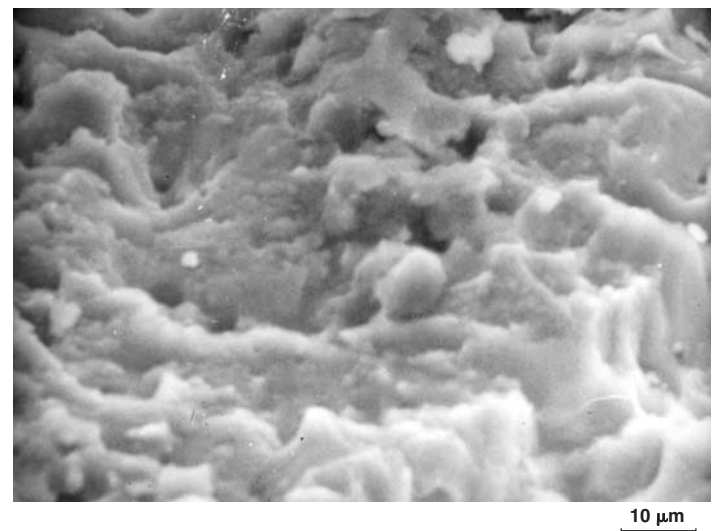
Shear dimples indicative of overload fracture on the outer skin region away from the rivet hole toward the leading edge
